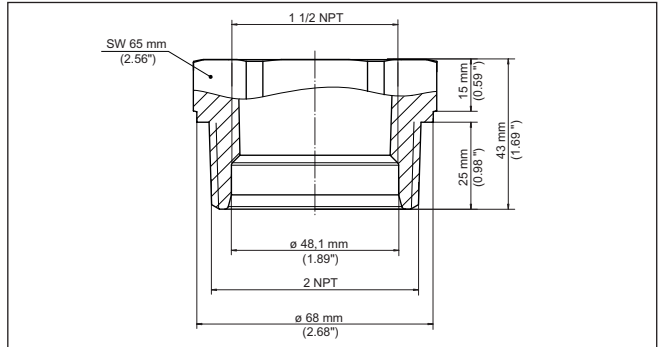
Dimensions, threaded adapter 1½"NPT on thread 2"NPT
